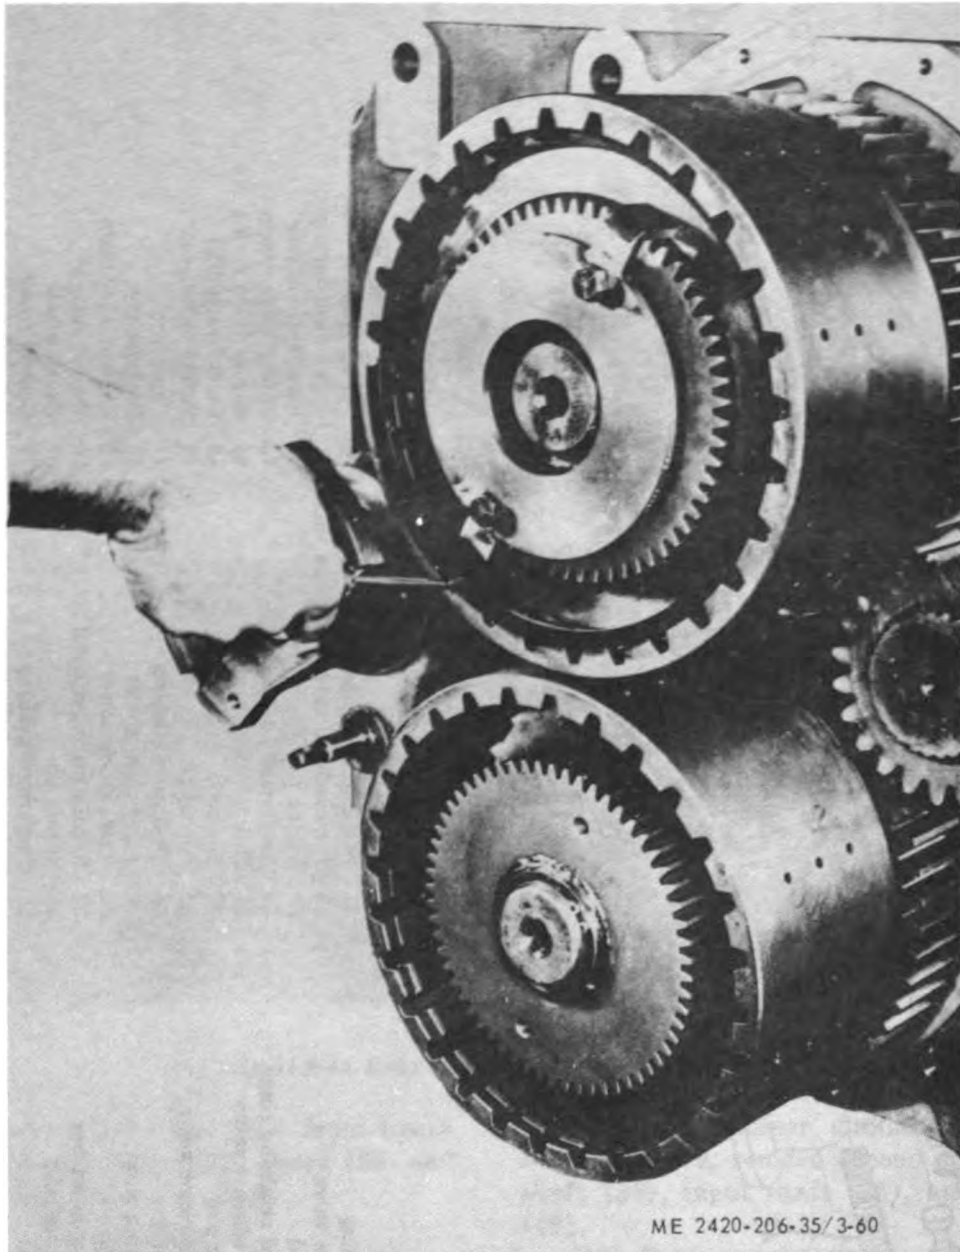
Compressing clutch spring and removing retaining ring from clutch drum.
